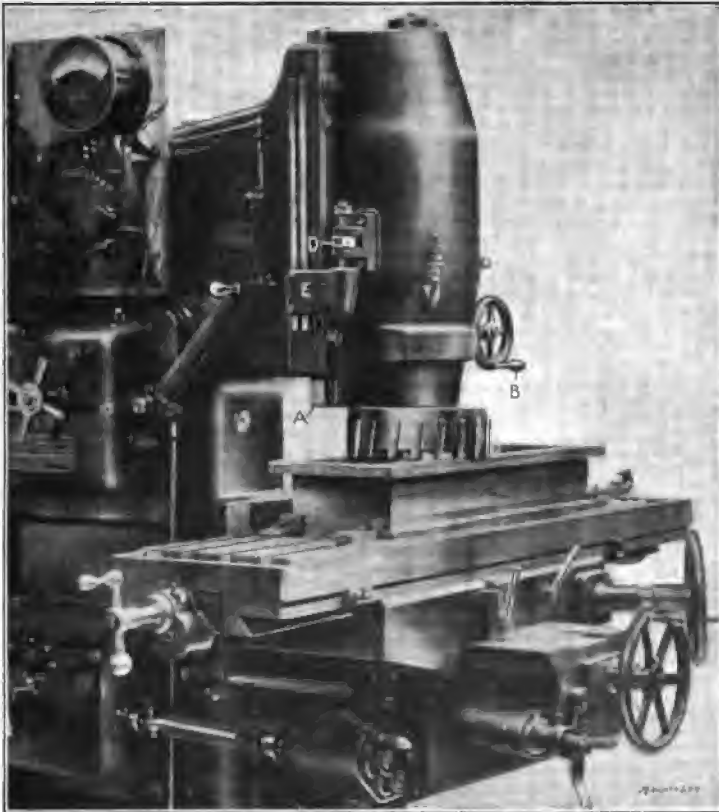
Finishing Top Surface of a Casting on a Cincinnati Vertical Machine
